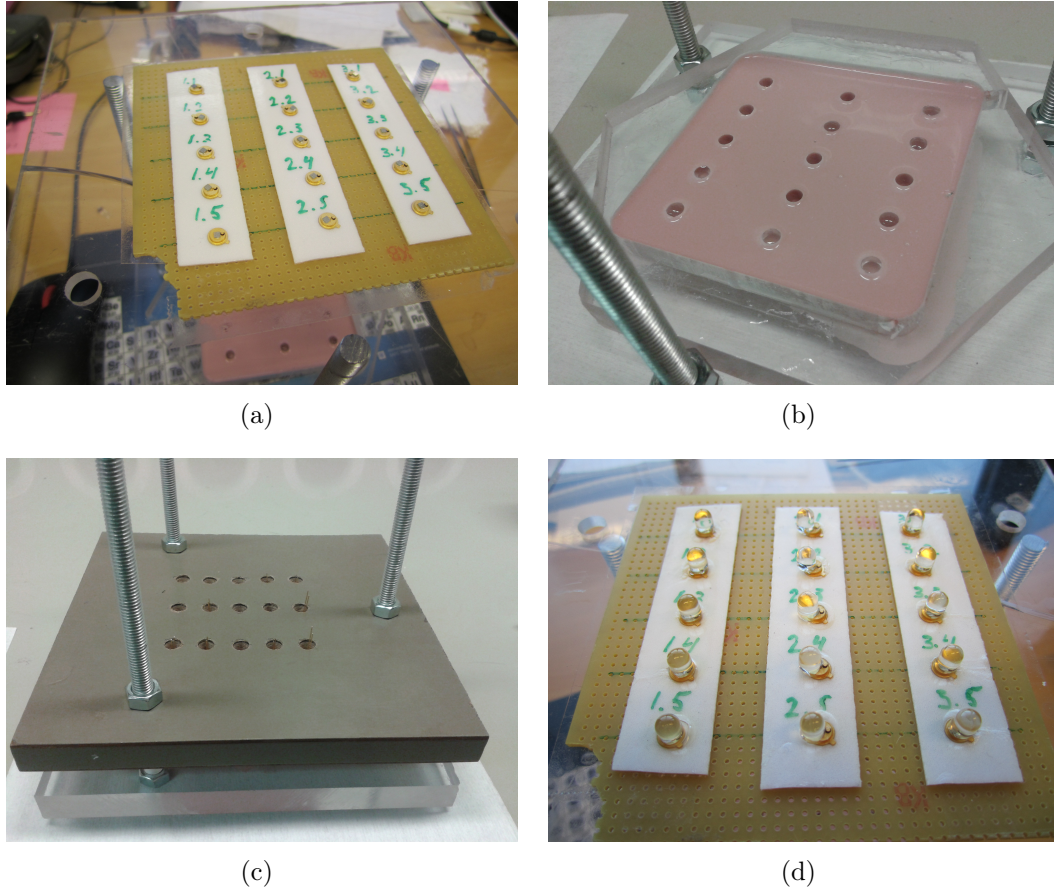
Process stages for the epoxy dome molding. (a) The preparation of the encapsulation device and partially packaged LED components. (b) Mixing, vacuum treating and dispensing of epoxy to the mold holes. (c) Mount stage stacking on top of the mold stage and room temperature three day curing. (d) Detachment of the mold stage by lifting and sample inspection.
